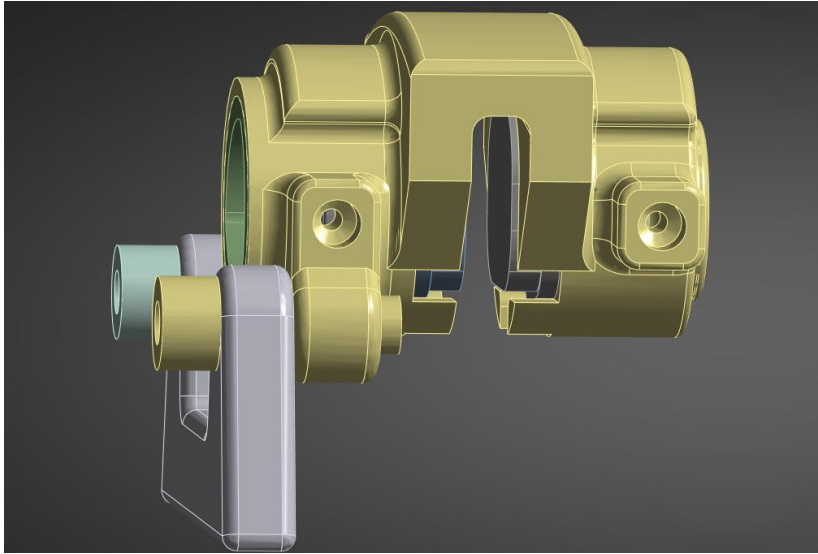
Brake caliper design rear side view (Atte Jaakkola. 23.2.2026.)
